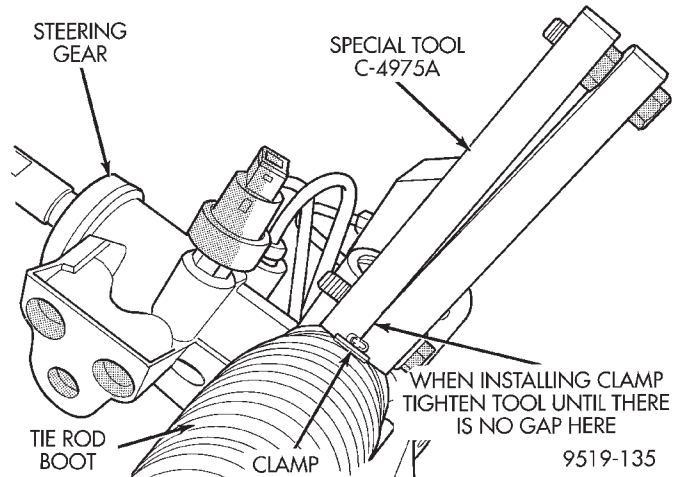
Installing Tie Rod Boot To Steering Gear Clamp
